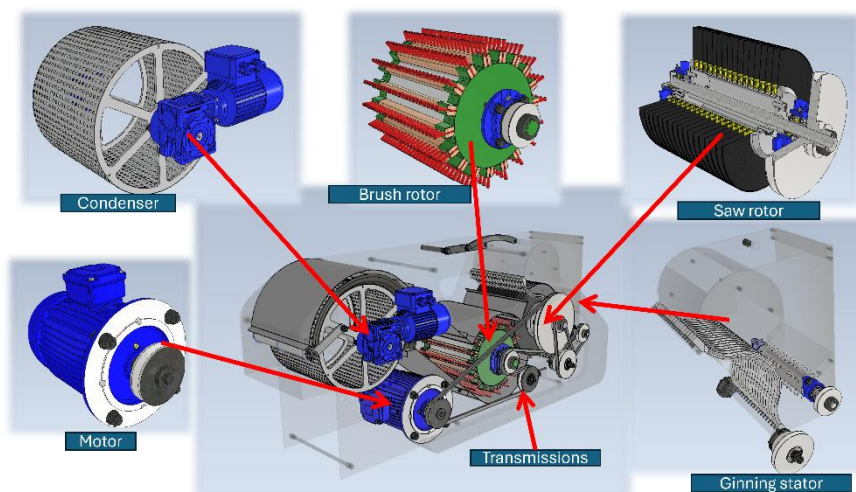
Main components of the designed machine. It shows the three-dimensional (3D) design made by computer, indicating its main parts.
